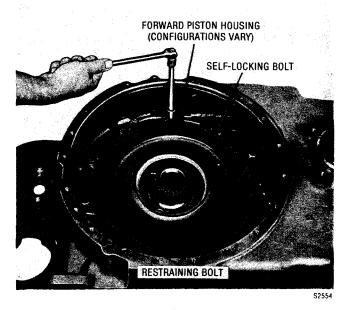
Removing forward clutch piston housing bolts (TT, TTB 2221-1, 2421-1)
